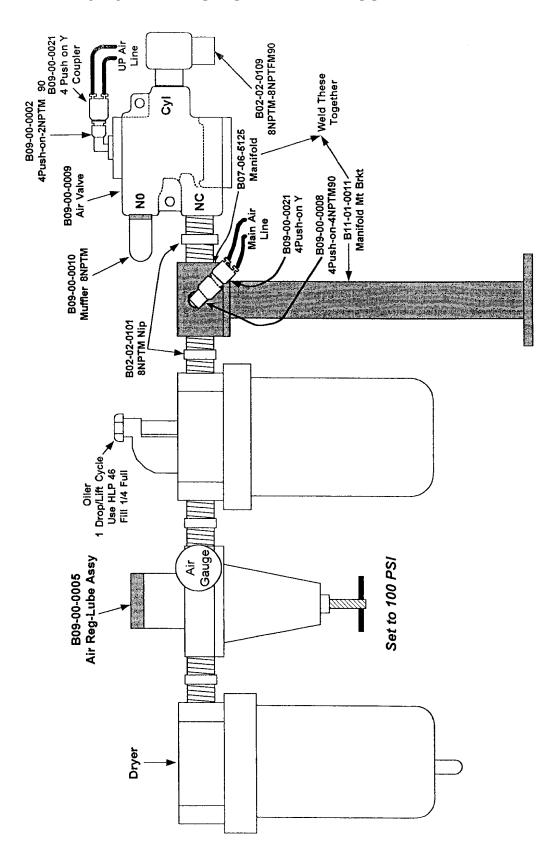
Air-Reg-Lube-Valve Assembly Drawing
